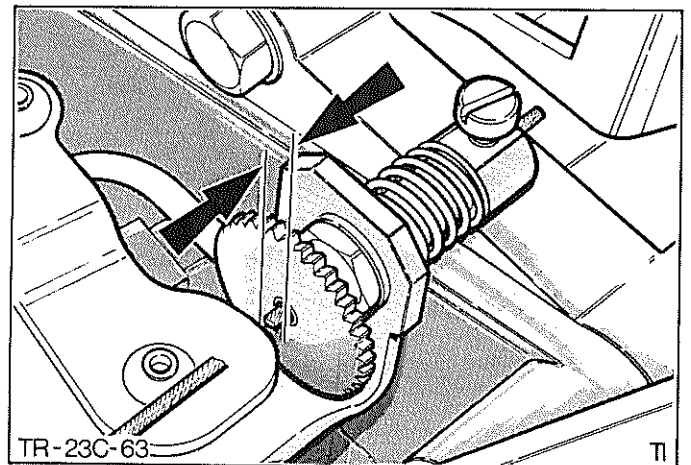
Adjust knurled screw on 'waxstat' control cable to obtain 2,5 to 3,5 mm clearance.
